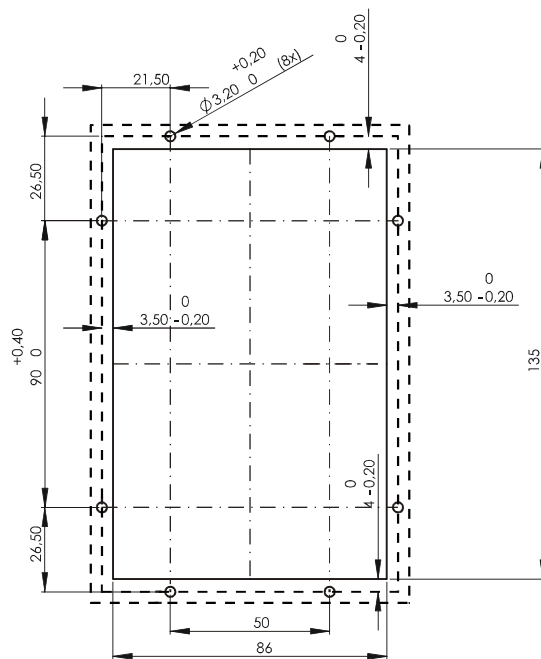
Transas ES4 dedicated keyboard. Trackball mounting hole
